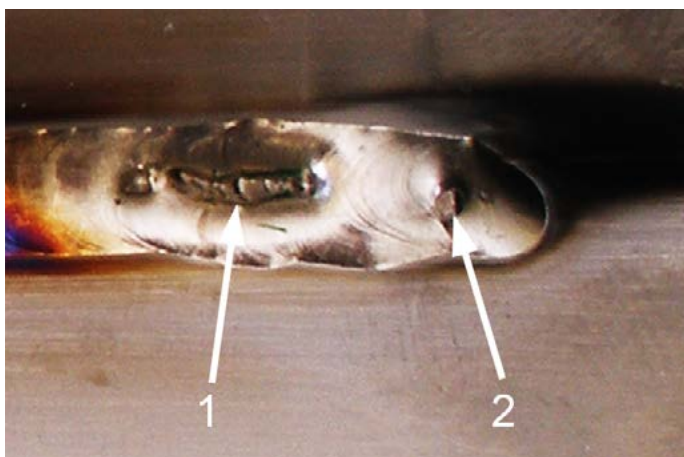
Weld crater with a scratch (1) due to immersing the wire in the weld pool metal and the wire adhesion area (2) at the end of the weld
